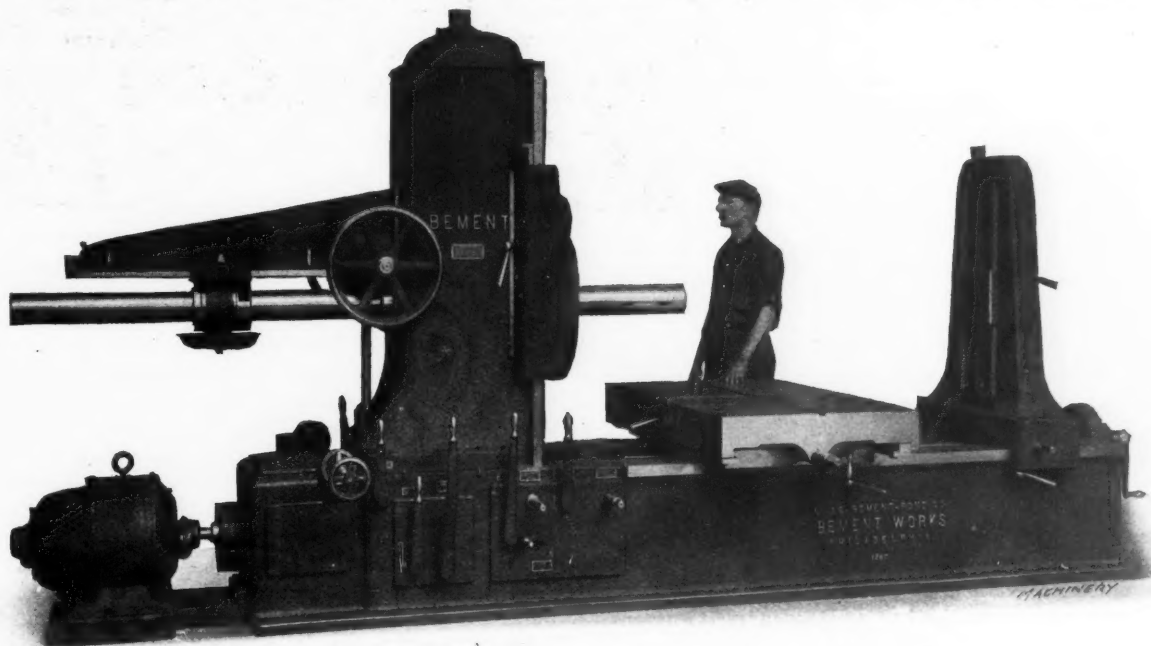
Niles-Bement-Pond Duplex Control Boring, Drilling and Milling Machine
